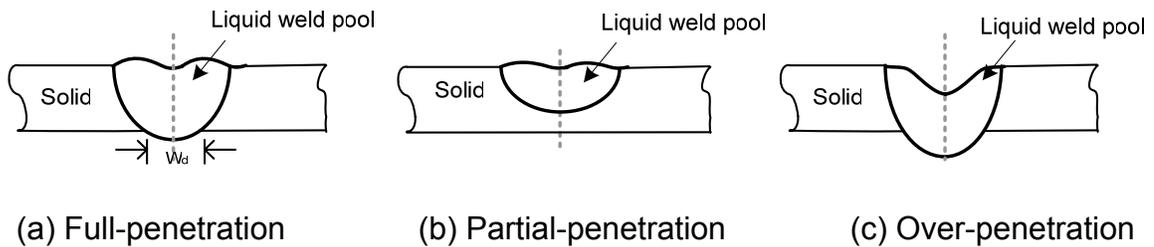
, Different penetration statuses (profiles) in the welding process [17]
